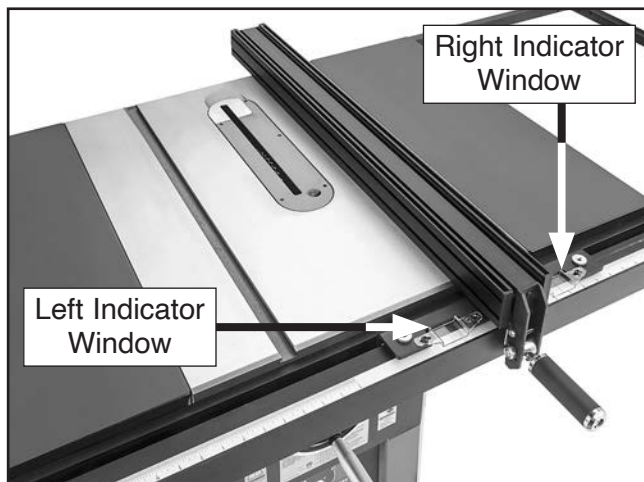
Example of adjusting fence with a  $\frac{1}{64}$ " offset.
